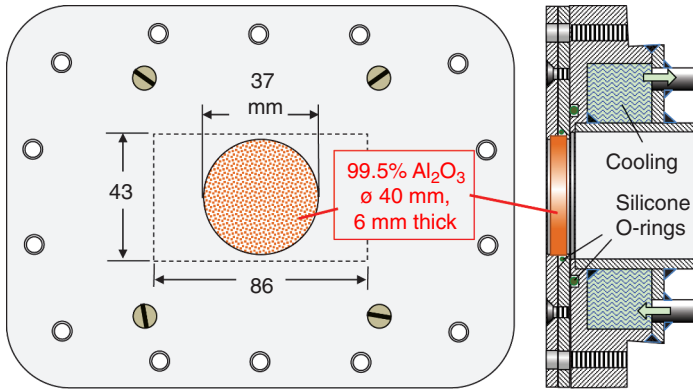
Construction of a sealed ceramic window for TE₁₀ waveguide 2.4 GHz. The back flange on the vacuum side is water cooled. The flange of the coupled waveguide (not shown) can be flat or a choke type.
